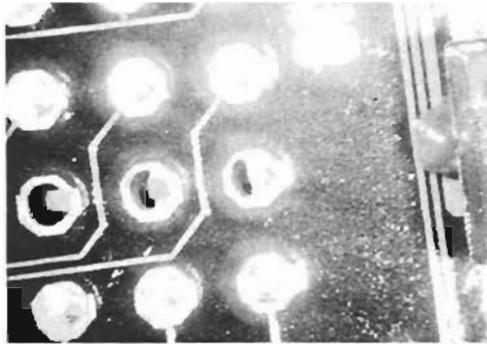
Adhesive contamination prevents complete fillets (EPS)
